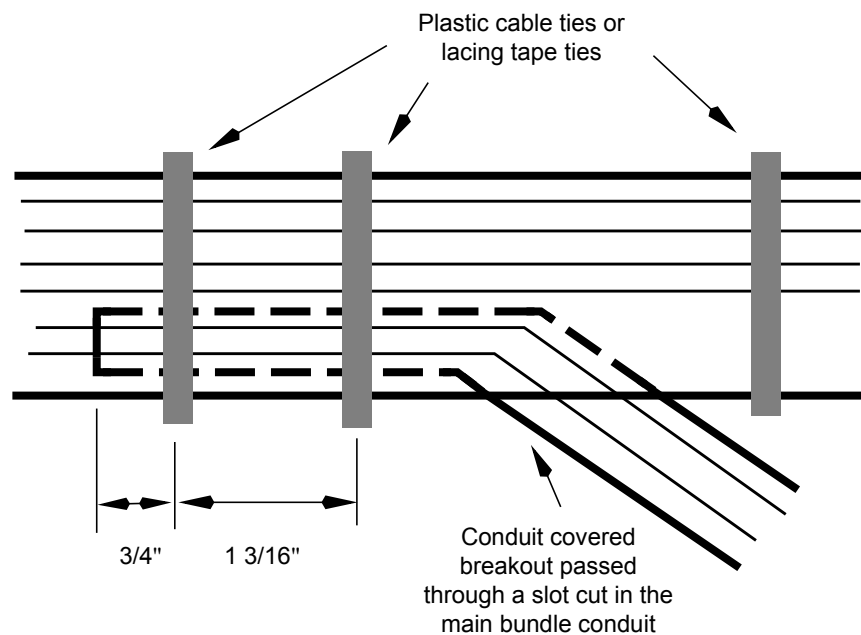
Main Bundle Covered with Open Conduit, with a Breakout Covered with Open Conduit
